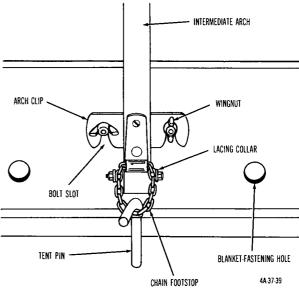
Attaching arches to floor of tent, frametype, insulated, sectional.
